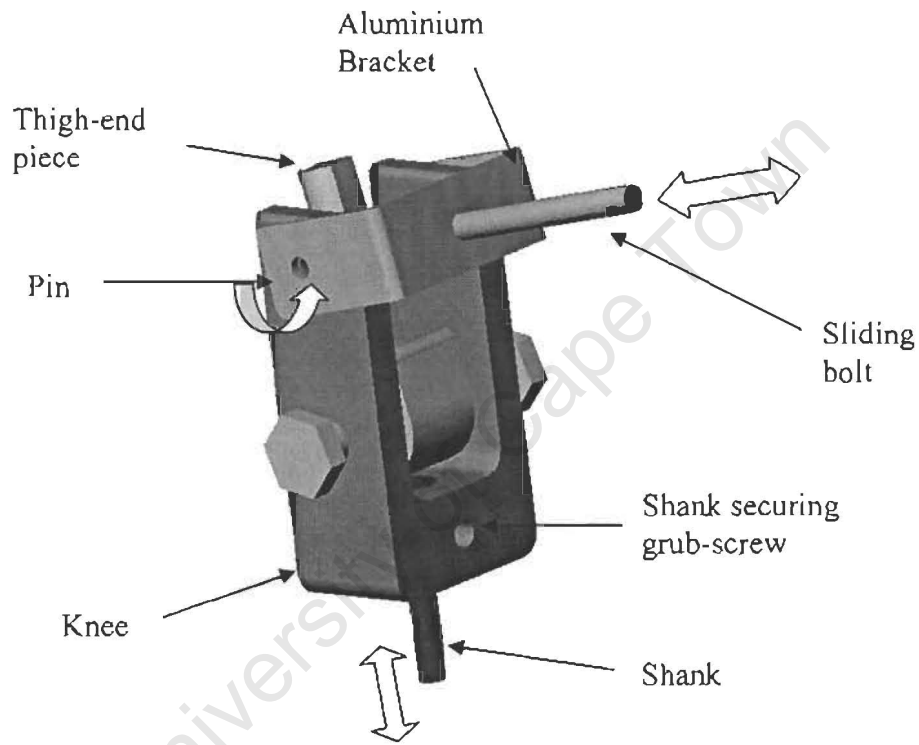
Knee joint assembly showing knee-stop and thigh-end piece
